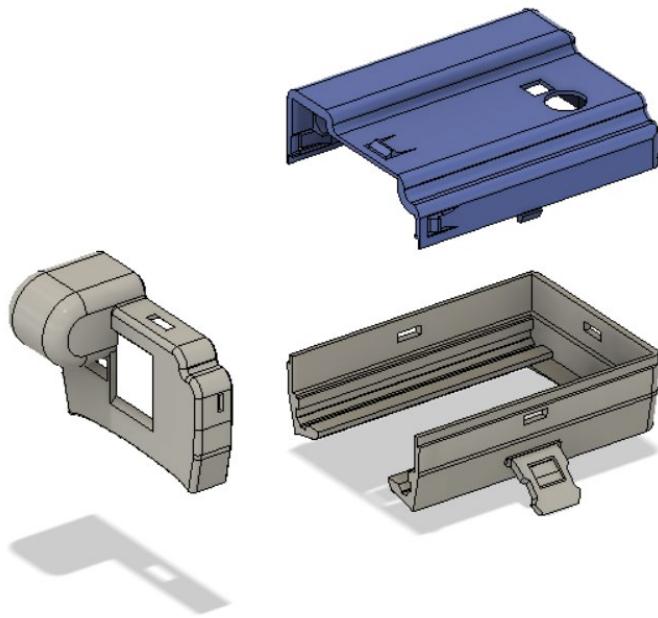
Exploded View of LoRaware Wireless Device Enclosure Assembly
